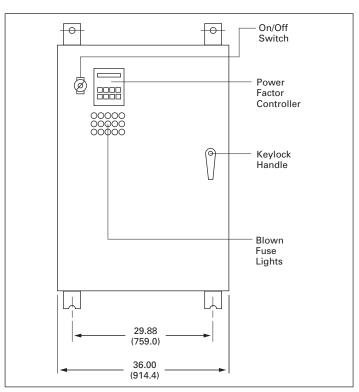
FRONT VIEW OF ENCLOSURE J
